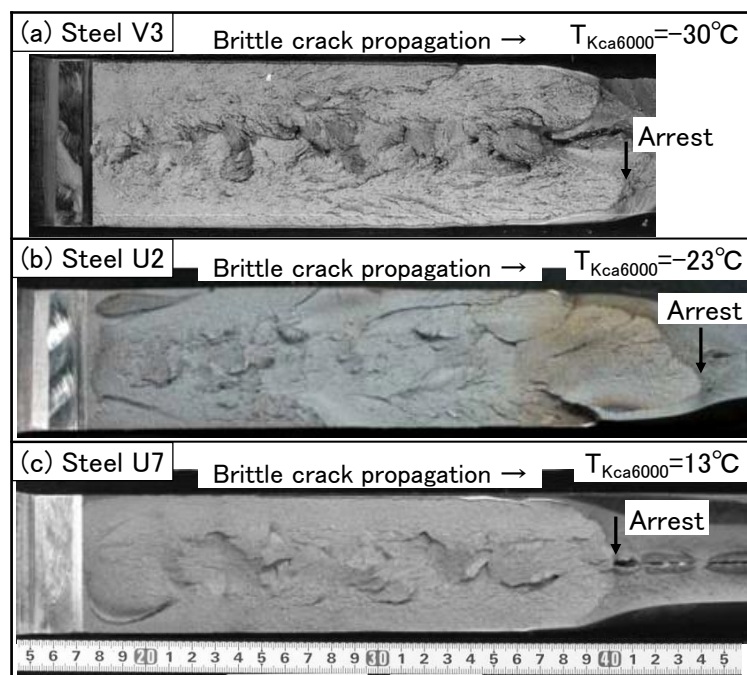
Examples of fracture appearance of the ESSO tests for the Steels V3, U2 and U7 produced in the plate mill (ESSO specimen width: 500 mm).
